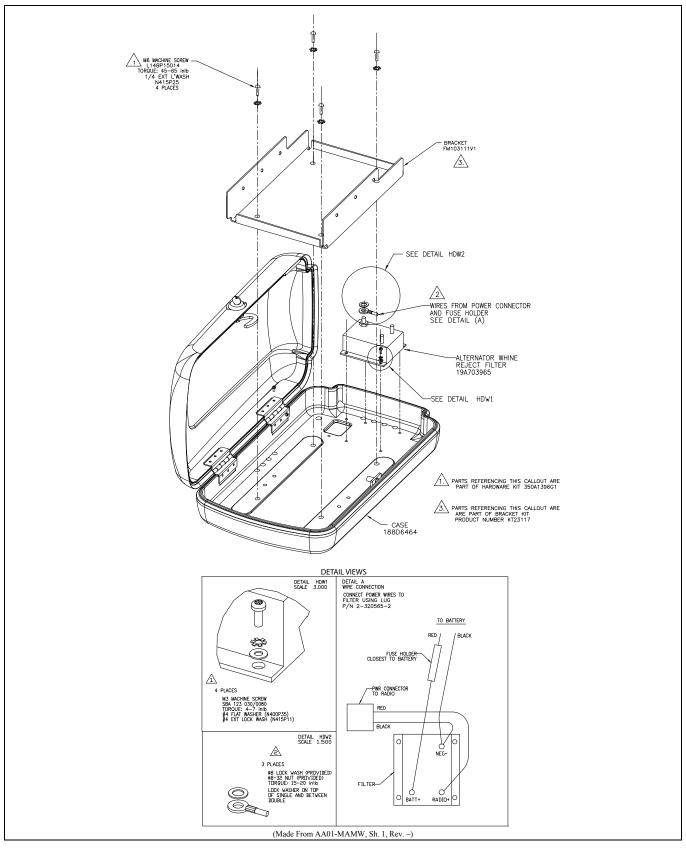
Installing the Radio's Mounting Bracket and Filter into the Motorcycle Radio Case
